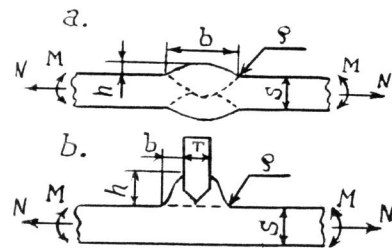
Typical welded joints and their geometrical parameters.
